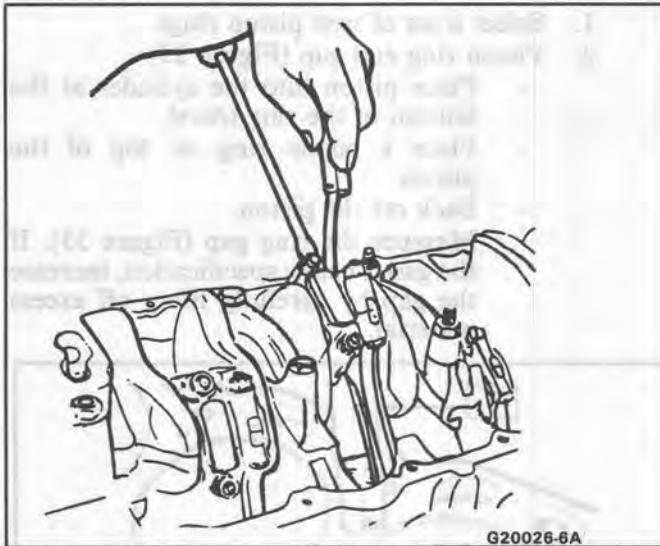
Measuring Connecting Rod Side Clearance (Double Rod Journal)
